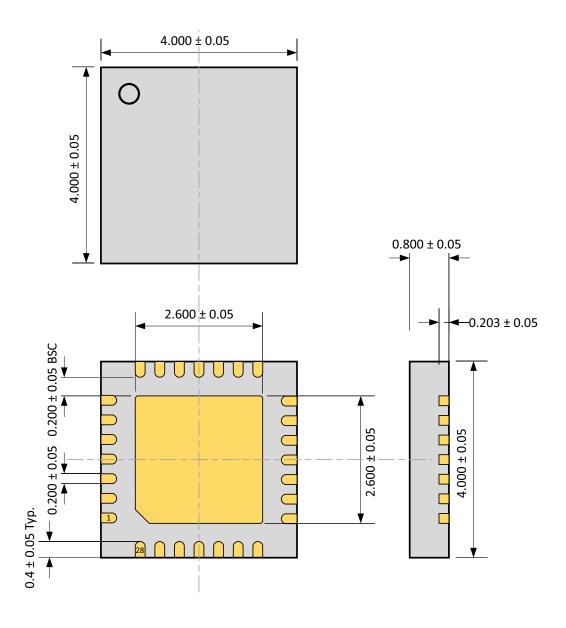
QFN 28-pin 4x4mm Drawing (All Dimensions in mm)
